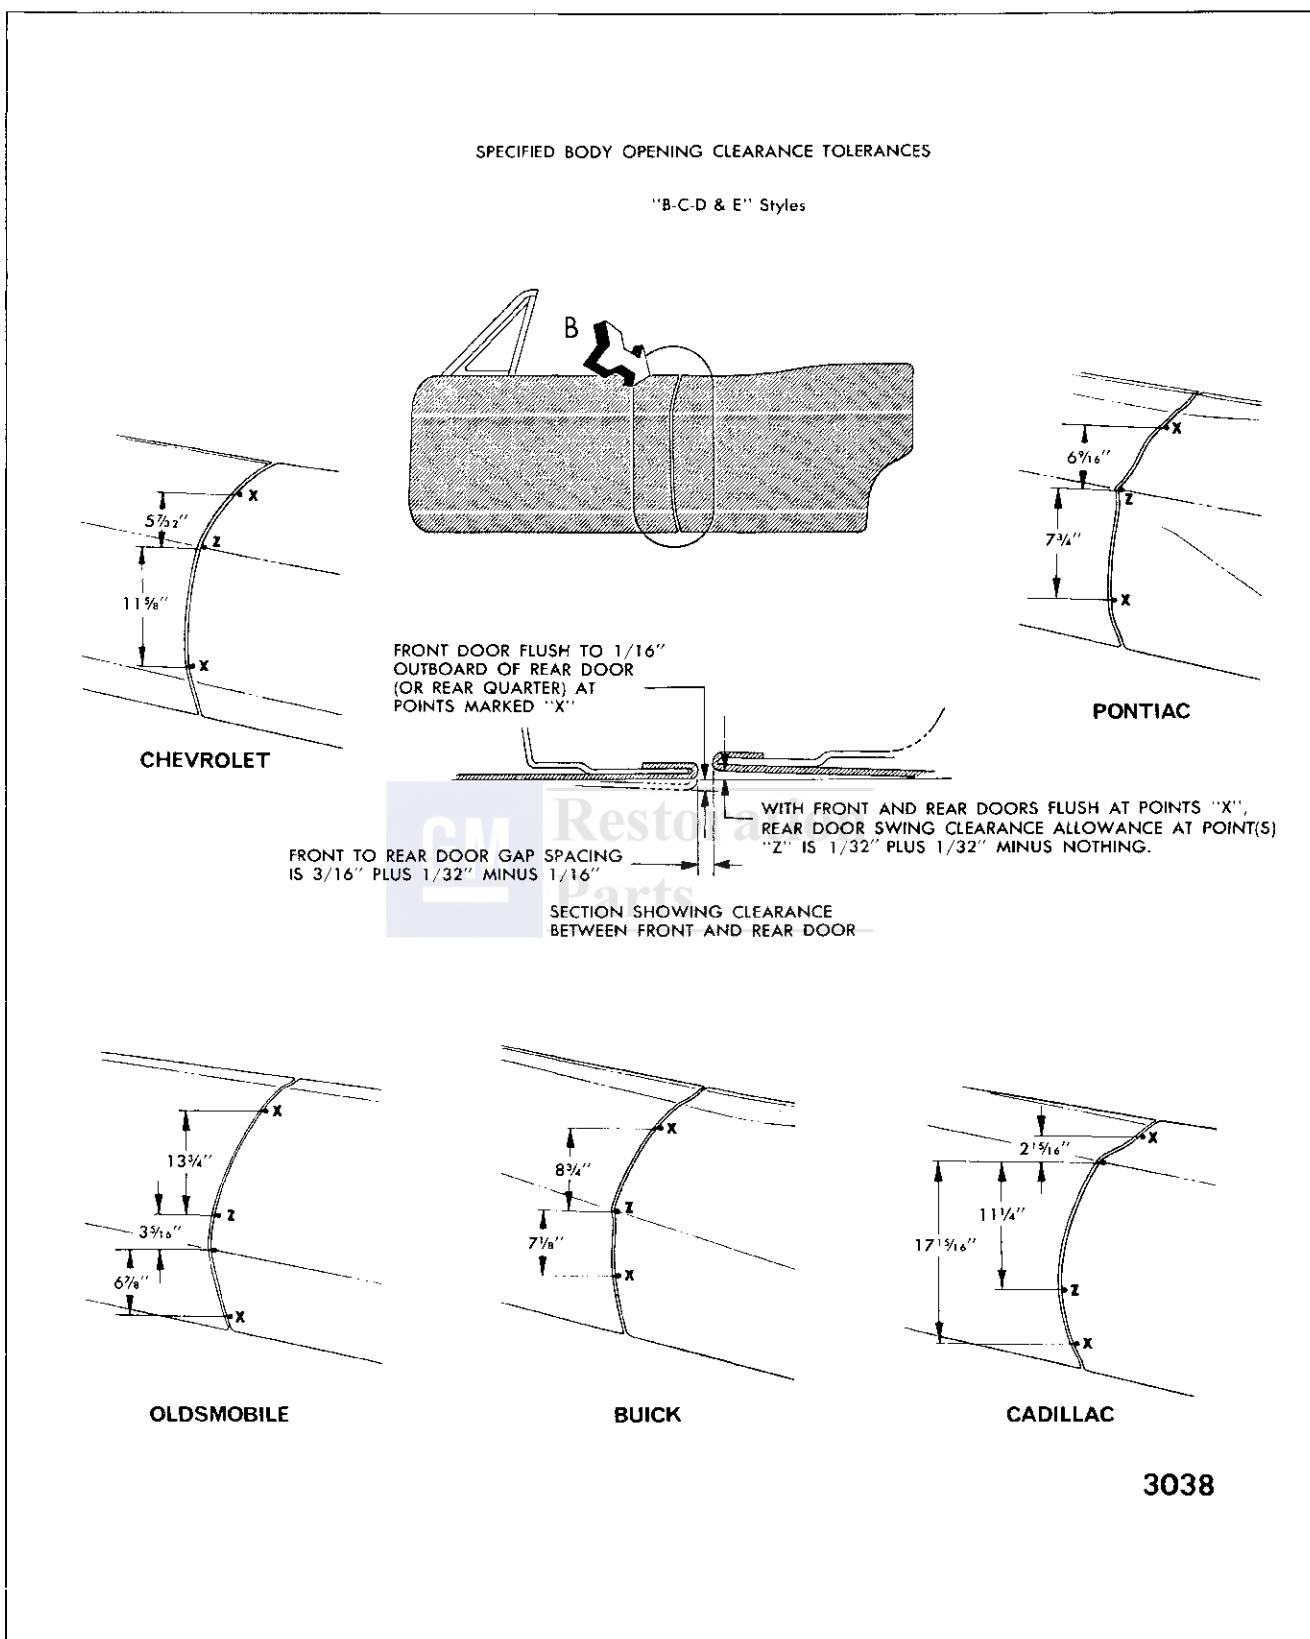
Specified Body Opening Clearance Tolerances - "B-C-D and E" Styles
